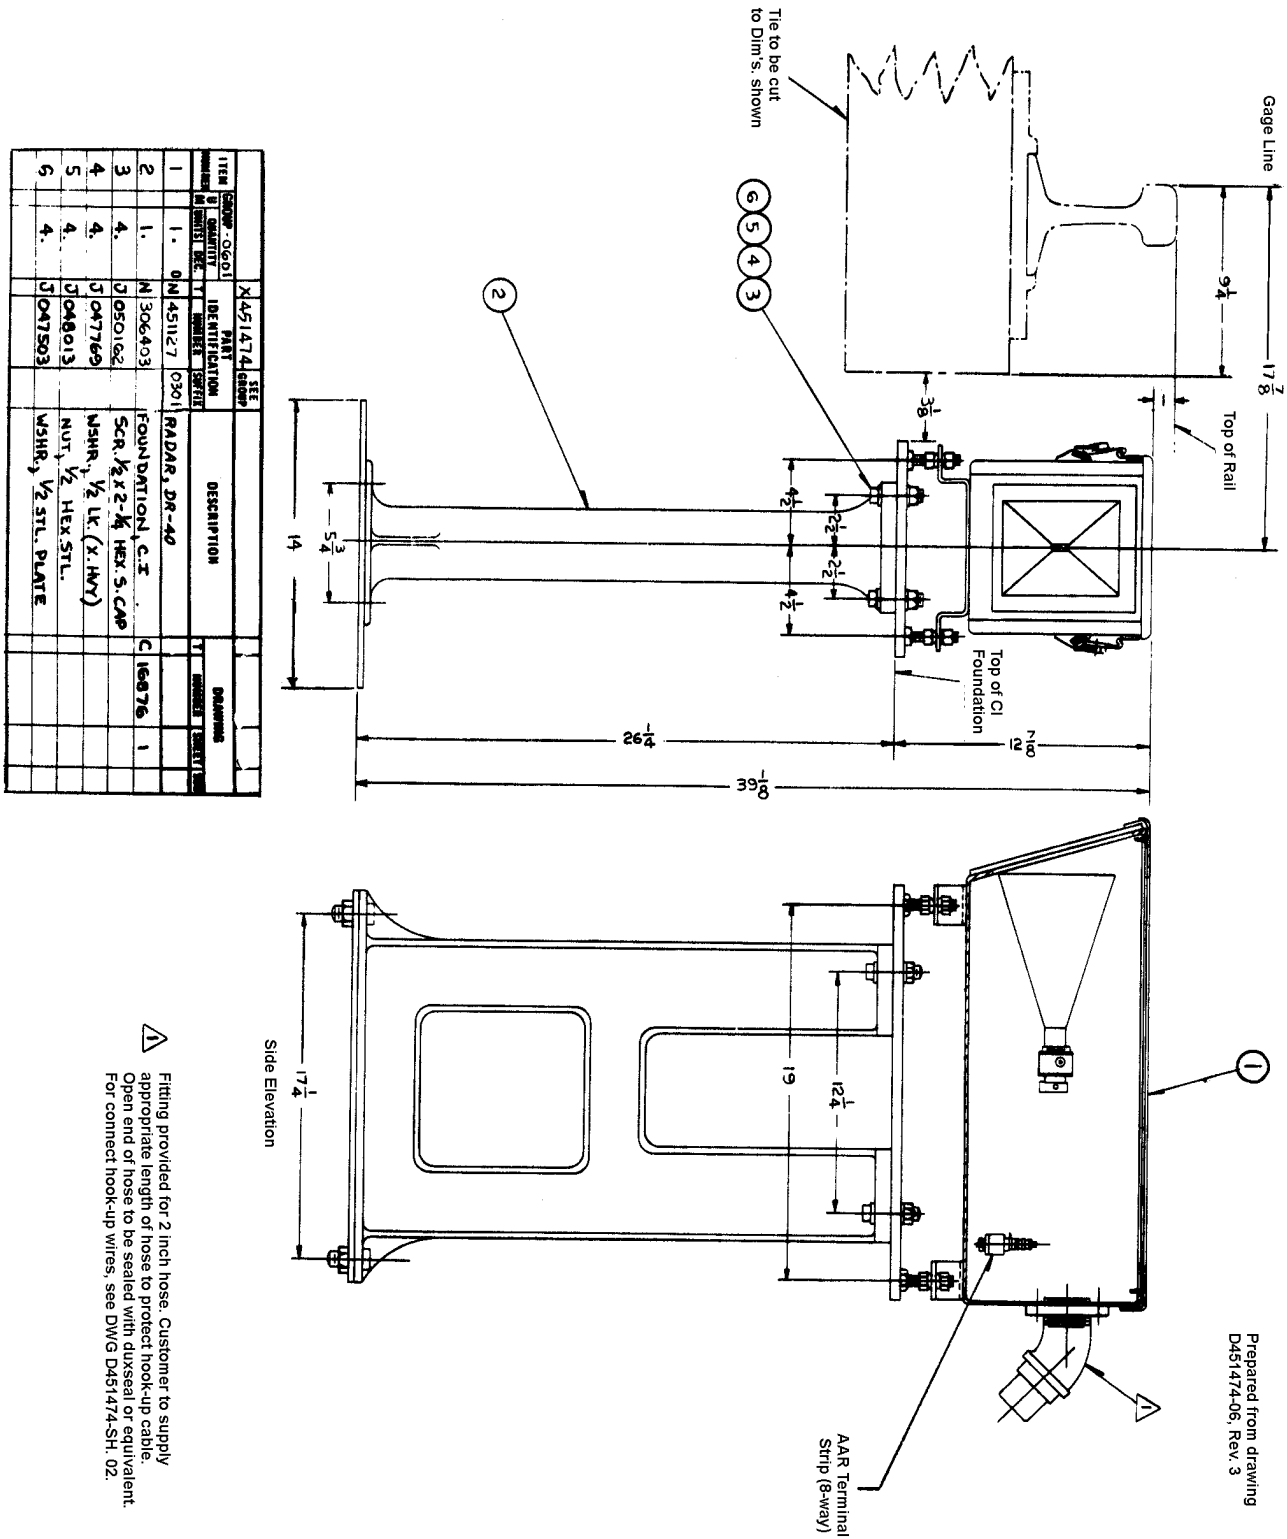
DR-50 Radar, Application Outside of Rails, Ballast Foundation
